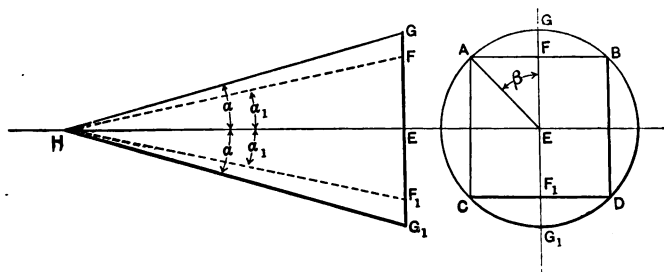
Determining the Angle to which to set the Index Head for Milling Flat-sided Reamers
